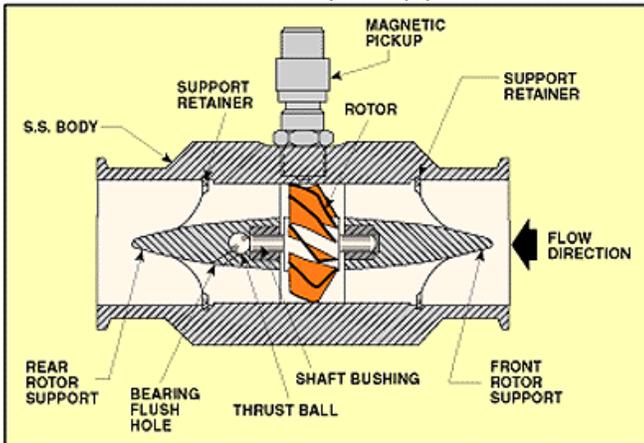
Turbine flowmeter consists of a multiple-bladed, free-spinning, permeable metal rotor housed in a non-magnetic stainless steel body. In operation, the rotating blades generate a frequency signal proportional to the liquid flow rate, which is sensed by the magnetic pickup and transferred to a read-out indicator
